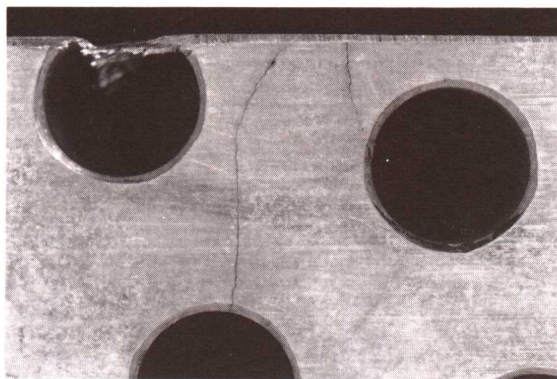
Corrosion fatigue cracks in a paper machine suction roll shell, made in austenitic grade 17-12-2.5.
